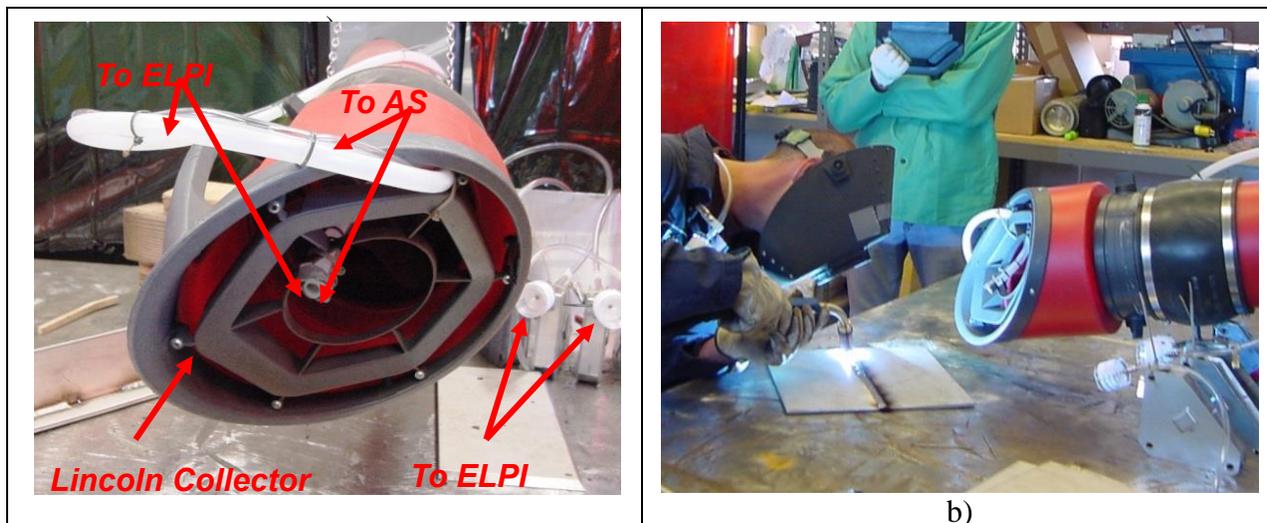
Near Fields Sampling during Field Welding and the Lincoln Collector
